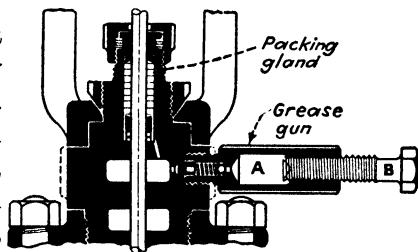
Jackscrew and grease pocket permit easy lubrication of stem guides and packing.
